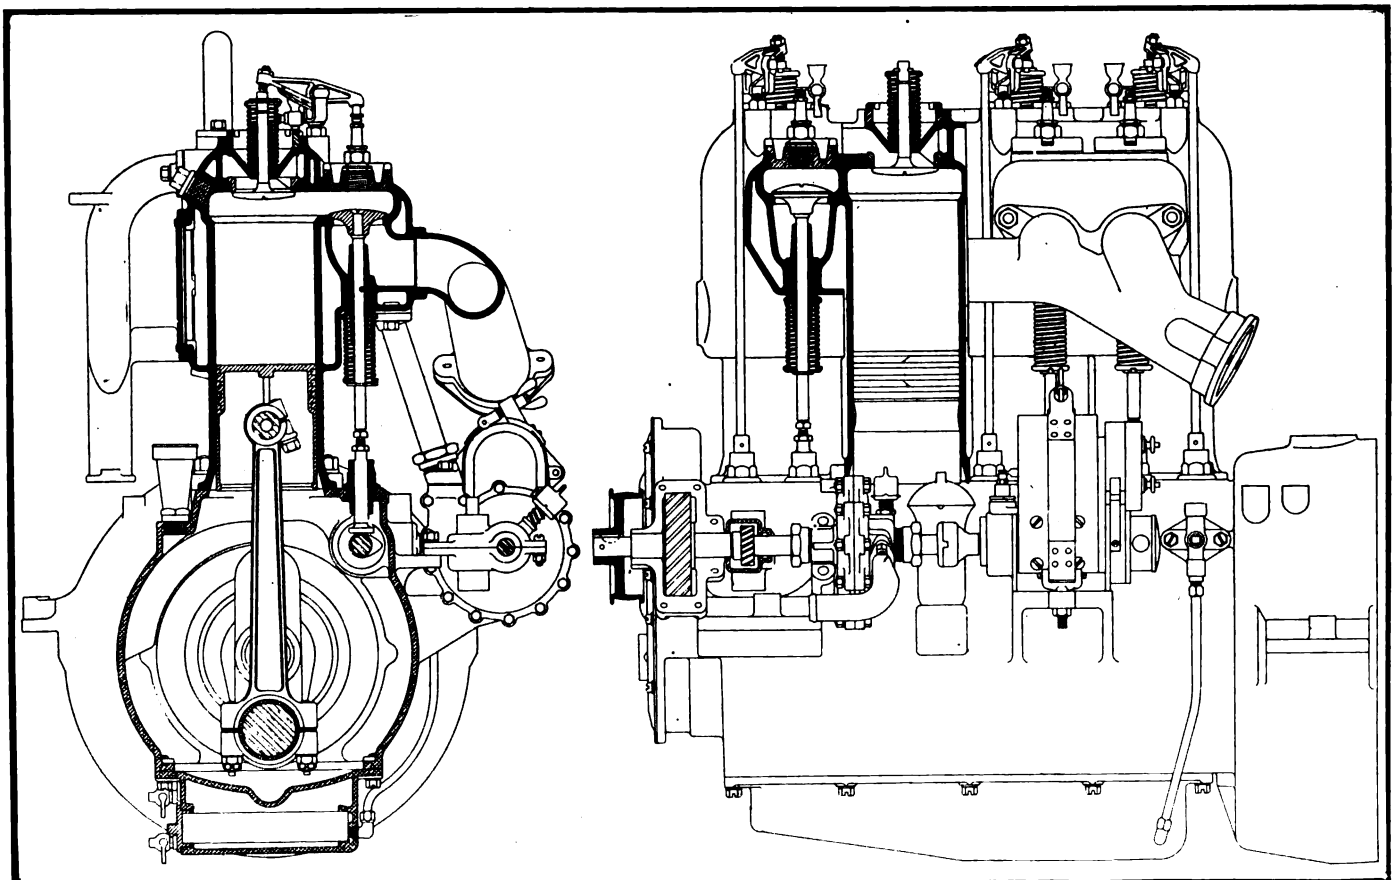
Transverse section and part longitudinal section through the Bergdoll motor
